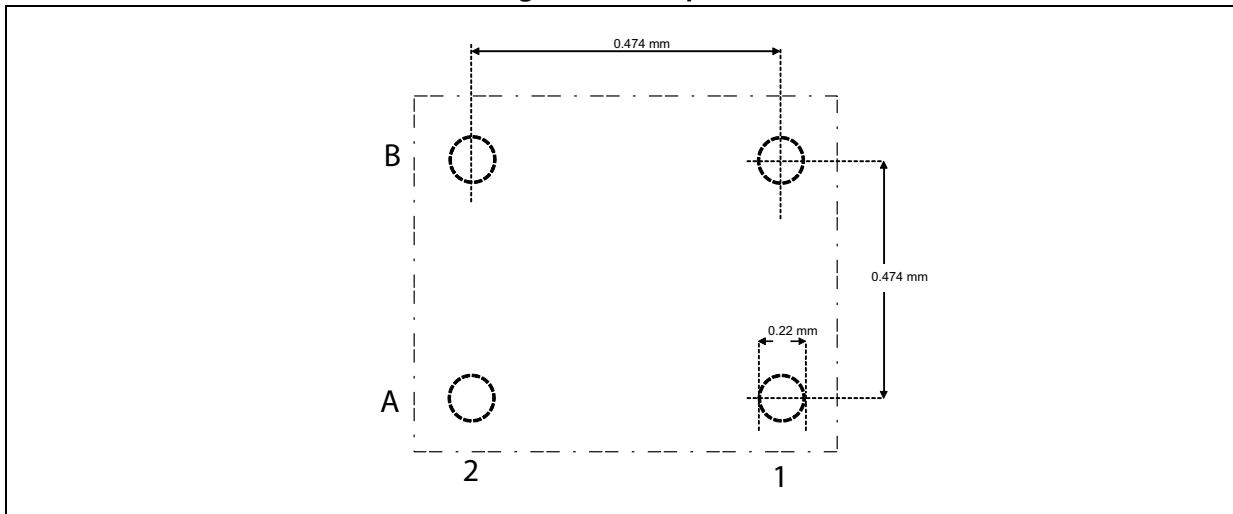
Footprint - 3 mils stencil - non solder mask defined
